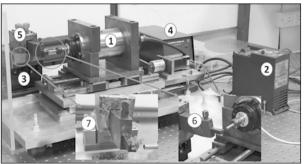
Micro turning machine - 1. Spindle, 2. VLT drive, 3. X-Y stage, 4. Micro motion controller, 5. Tool post, 6. Tool holder, 7. Mini dynamometer.
